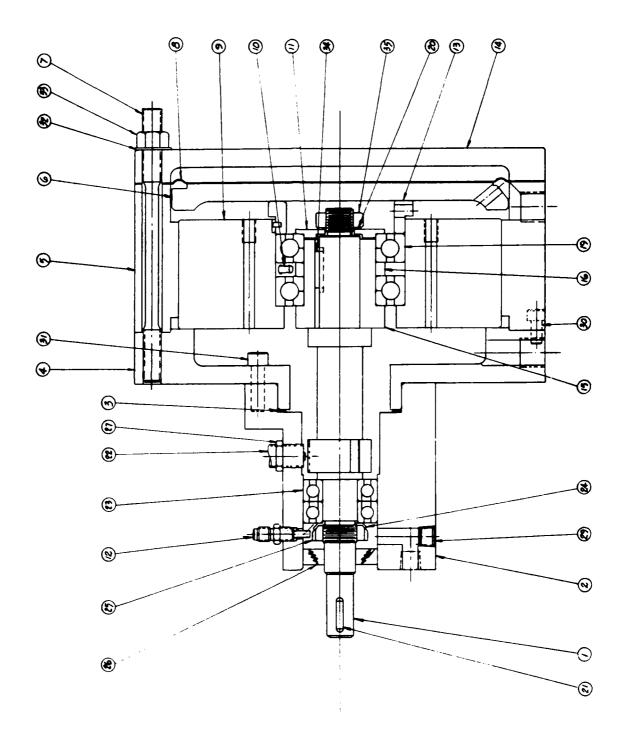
Cross-Section Of SwRI Test-Bearing Head
